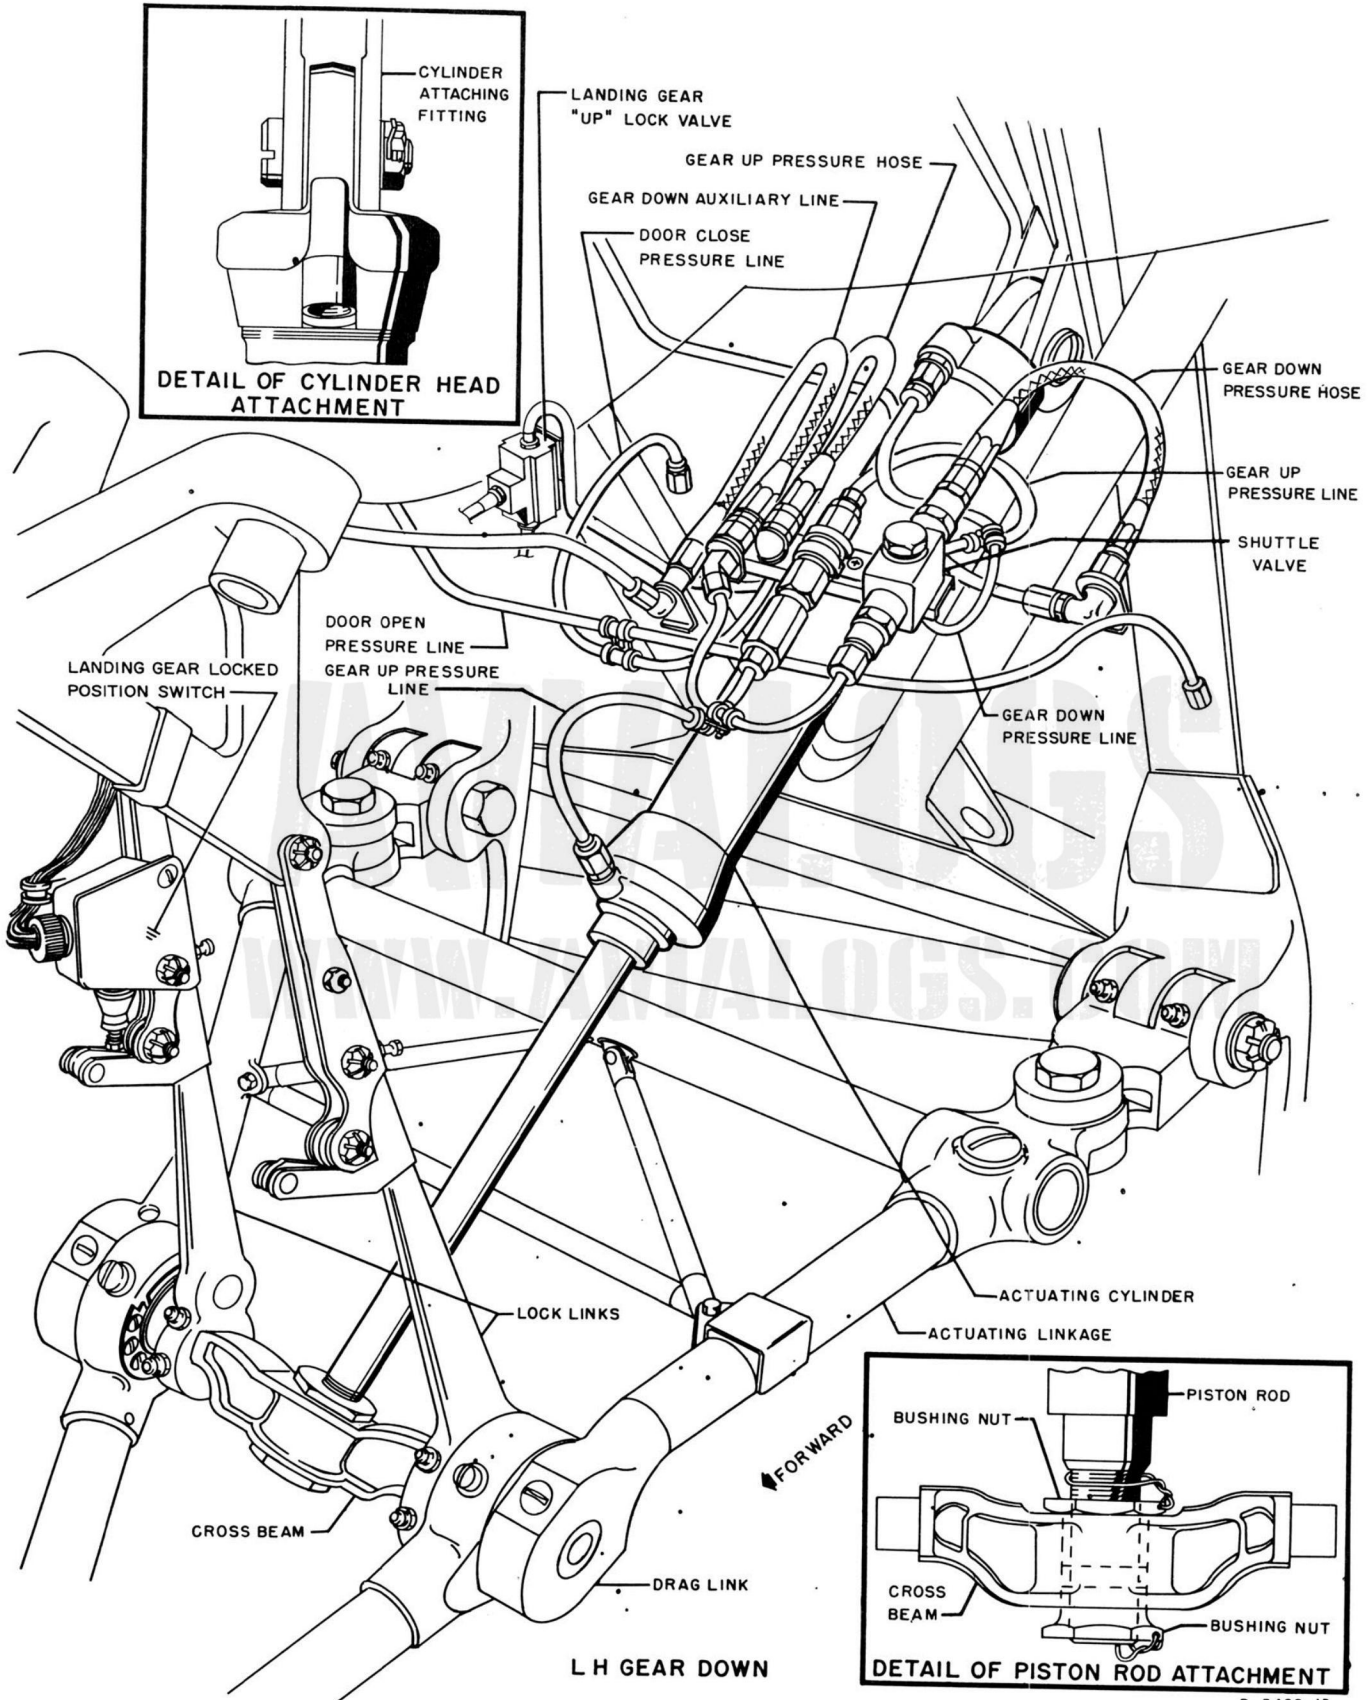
Main Landing Gear Actuating Cylinder and Up-Lock Valve Installation
